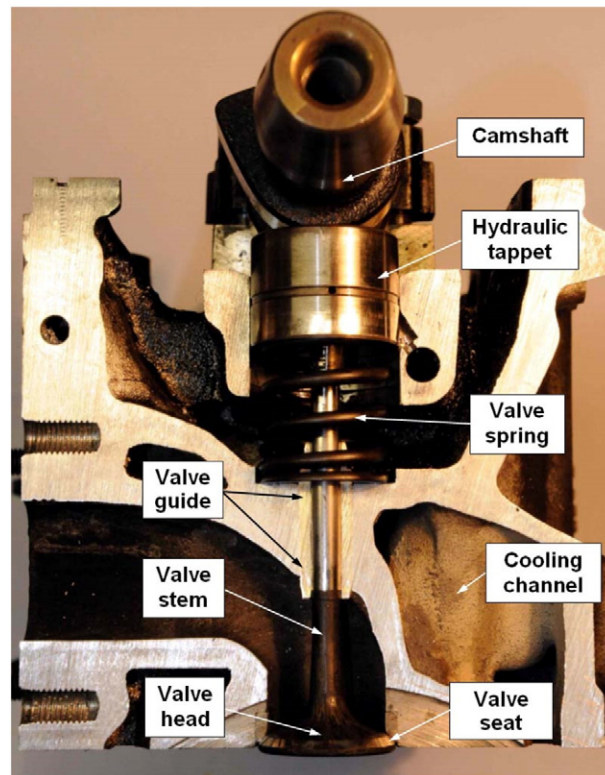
Exhaust valve assembled in the head of a diesel engine (cross-section of engine head in which the fracture of valve occurred).
